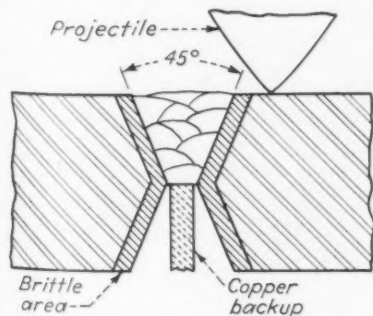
This welded plate failed to pass the shock test because the angle of the surface adjacent to the weld was not great enough to prevent shearing action in the brittle area next to the weld.
